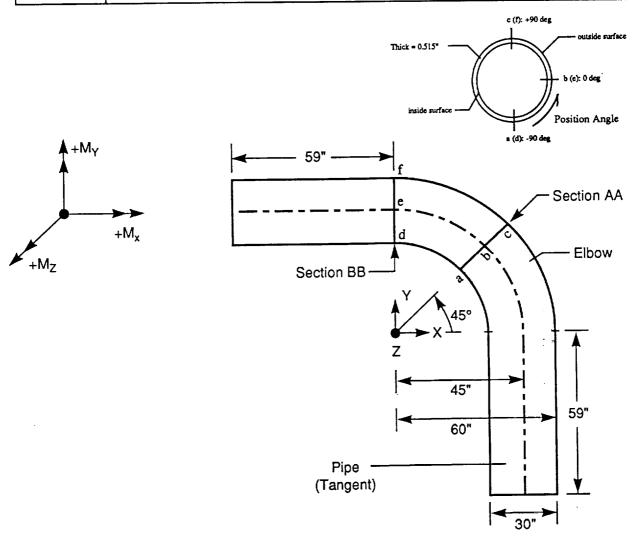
Geometric dimensions of pipe elbow and loading axes (a, b, c, d, e, and f indicate the positions for cross section).
